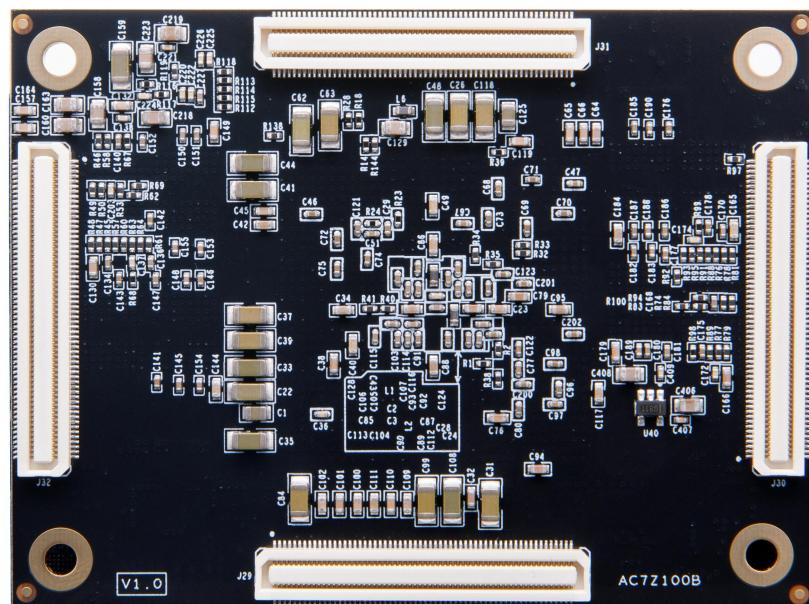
AC7Z100B Core Board (Rear View)
